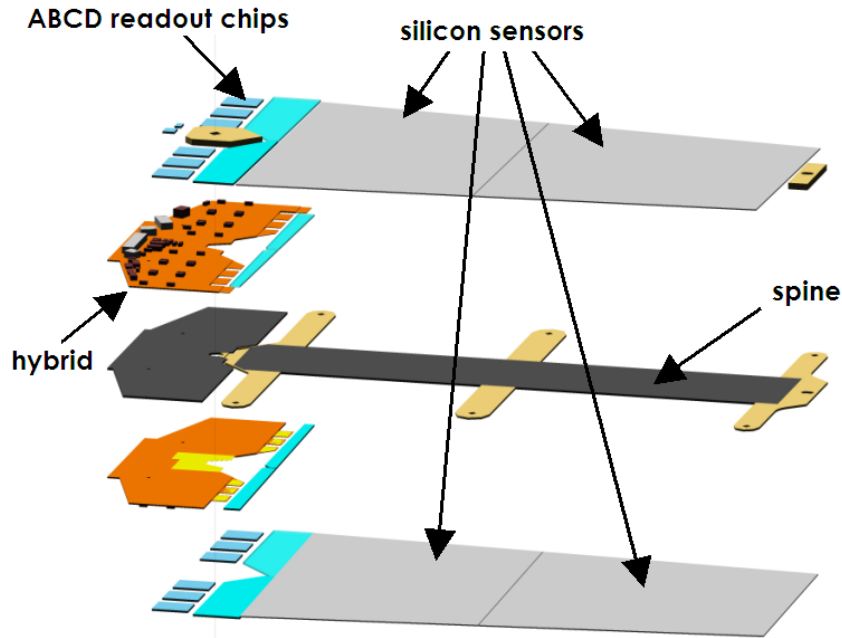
Exploded view of an SCT end-cap module showing the different components.
